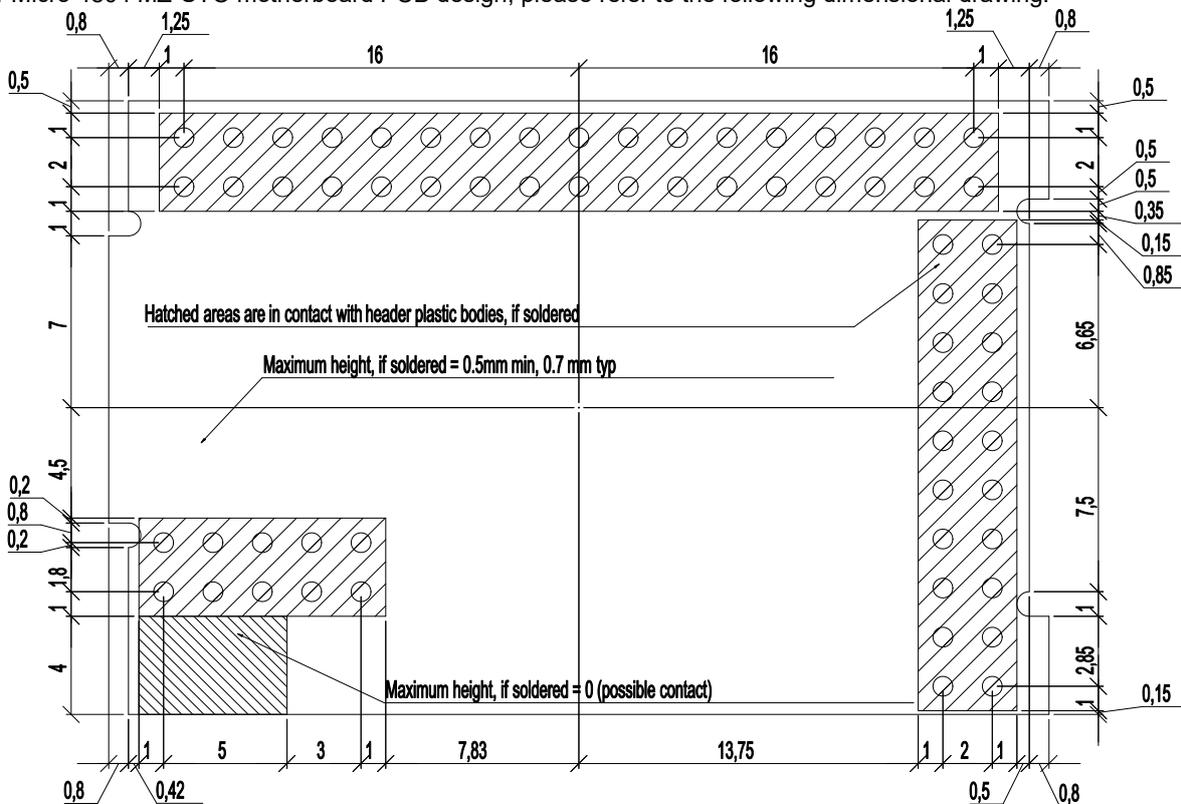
Micro 4804 MZ-STO PCB Footprint – Pins facing downward view
